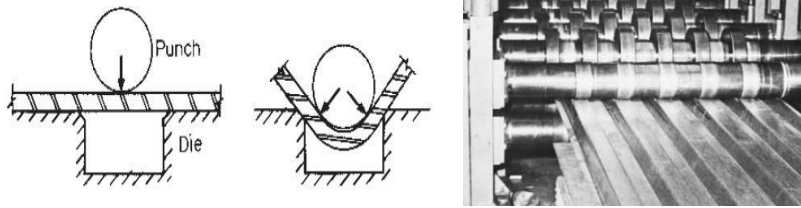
(a) Press braking¹ (b) Cold Roll forming machine²
